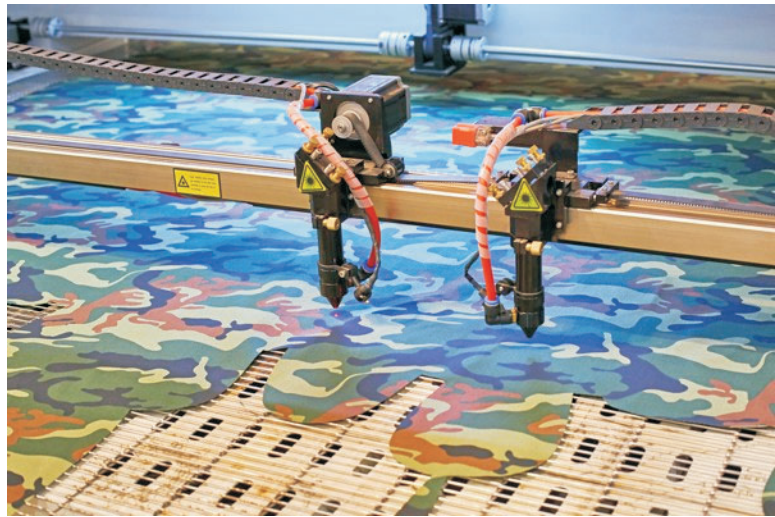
A laser speeds-up the manufacturing process by cutting multiple layers of fabric at one pass.
